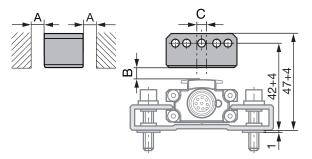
Dimensions and distances with BTL6-A-3801-2 magnet
